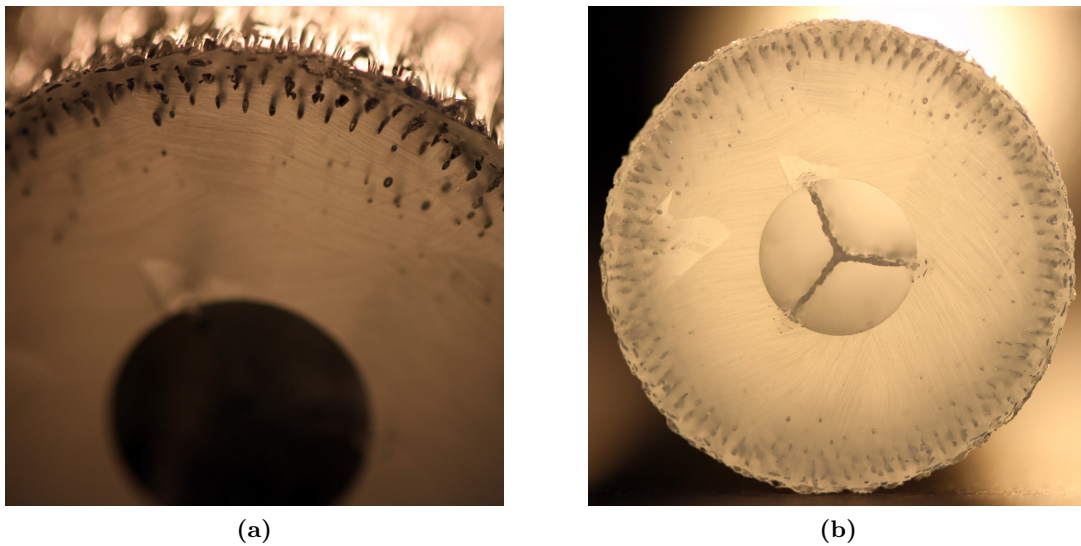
Cross sections of thick wall extrusion showing (a) bubbles under surface and (b) the well formed core.
